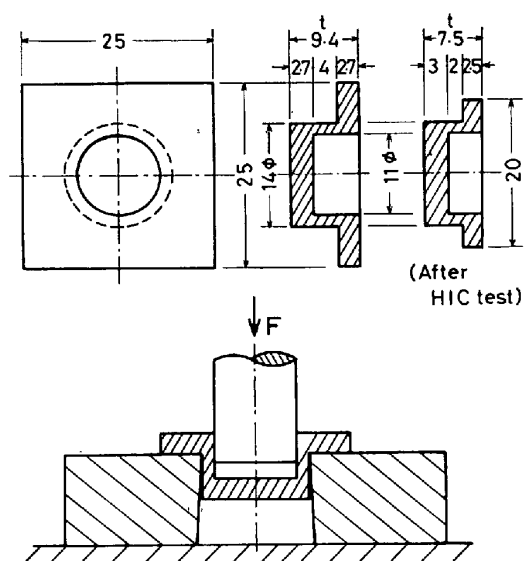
Specimen shape and device for tension test in through-thickness direction, which is intended to observe fractured surface parallel to plate surface.
